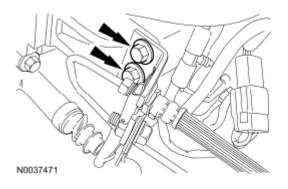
Locating Clutch Tube Bracket Bolts Courtesy of FORD MOTOR CO.
